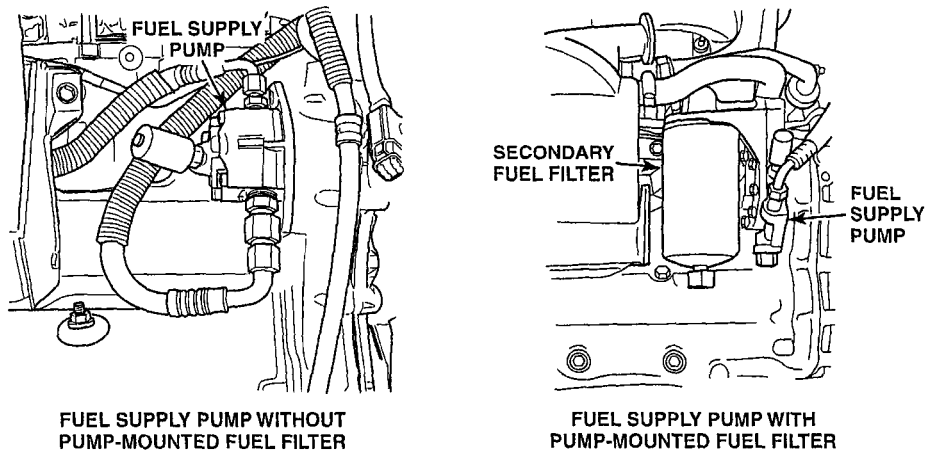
Fuel Supply Pumps with and without Pump-Mounted Fuel Filter
